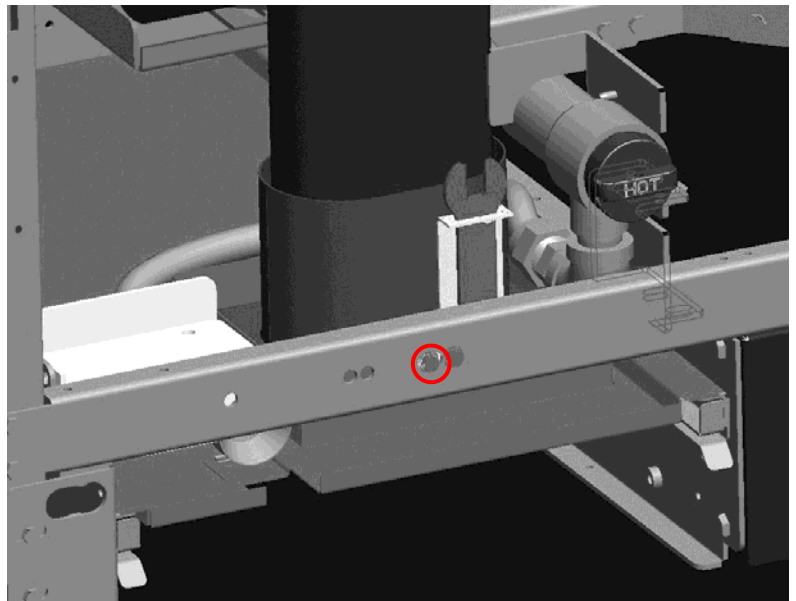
Position the pre-filter assembly and attach to channel using existing screws. Mount the wrench holder bracket. The left hole will need to be enlarged. See circle.
